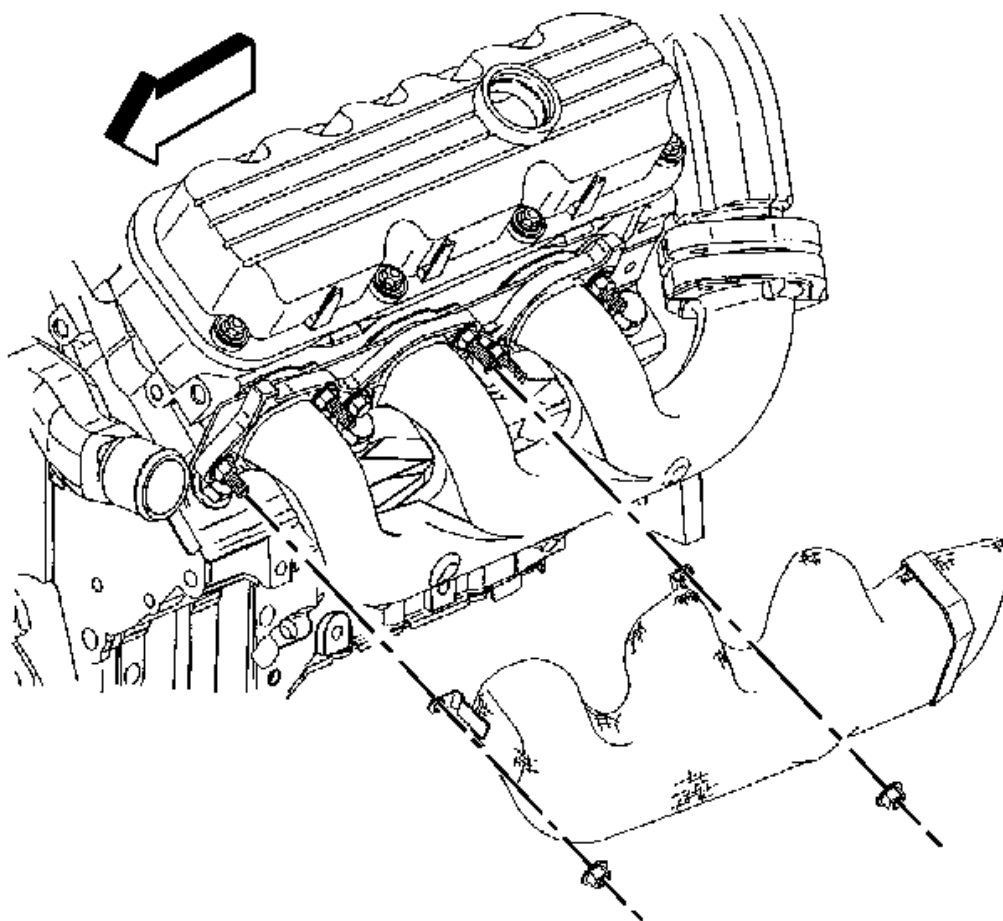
Installing Left Exhaust Manifold Heat Shield
